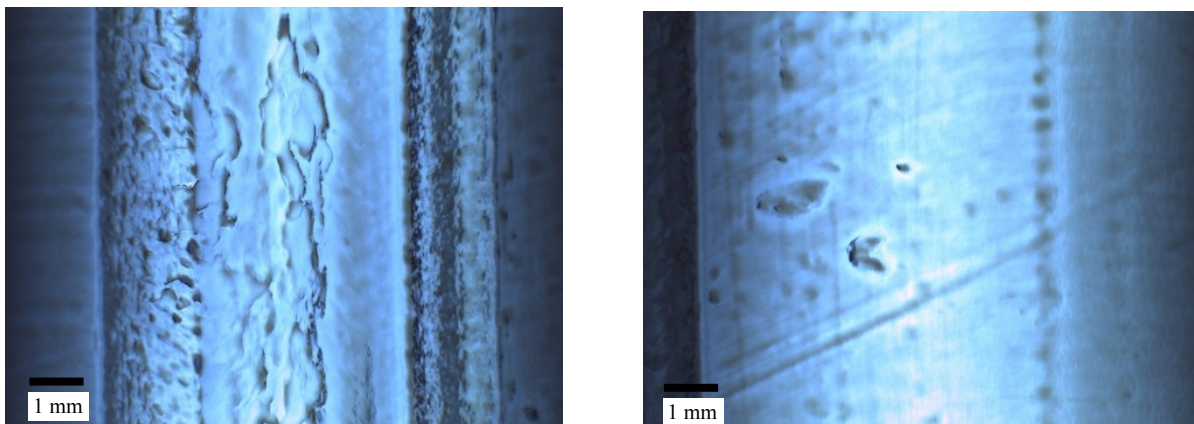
Protrusions on the weld (left) and ~9 mm from equator weld (right) in cell 5 near quench location of 5C75-003 after test No. 3.
